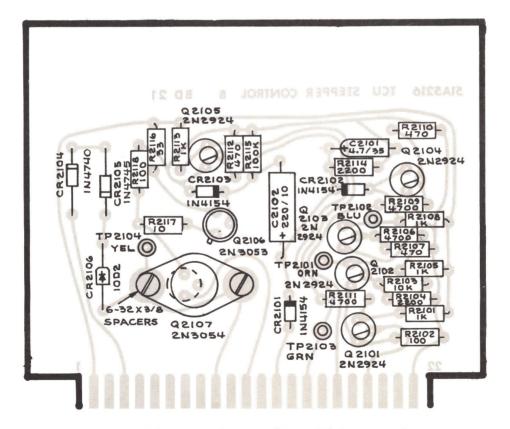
TCU Stepper Control B (Board 21), Parts Location
